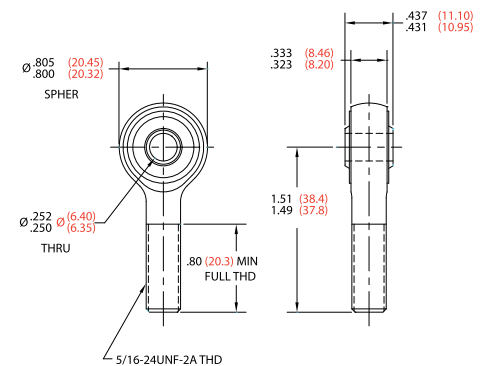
RA-90-9-X PART DIMENSIONS
